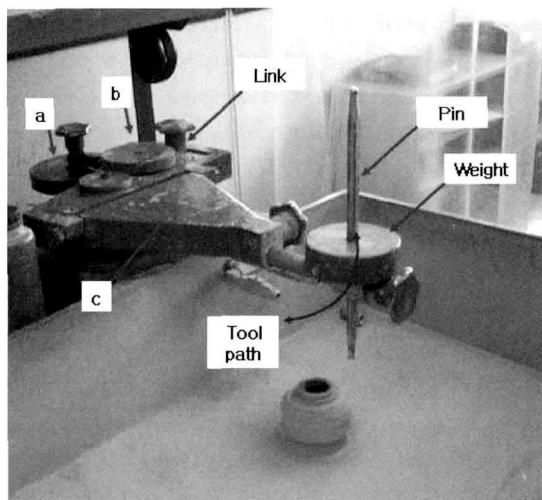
Photograph of Ohshkawa Type Polishing Machine
